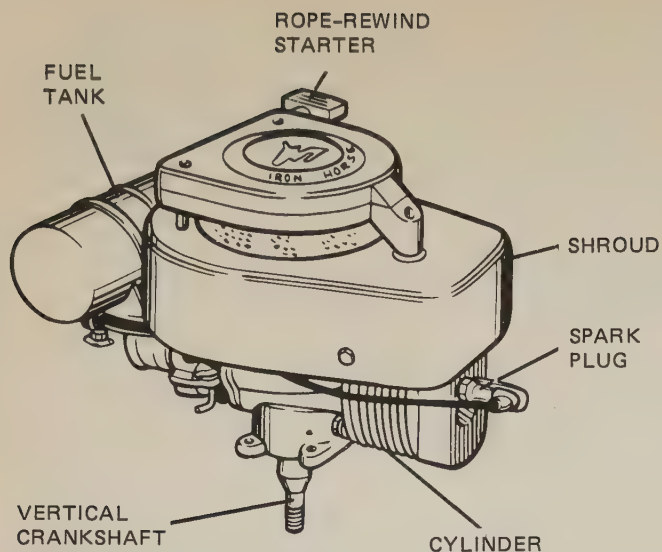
Single-cylinder two-cycle engine removed from lawn mower. (Lawn Boy Division of Outboard Marine Corporation)
